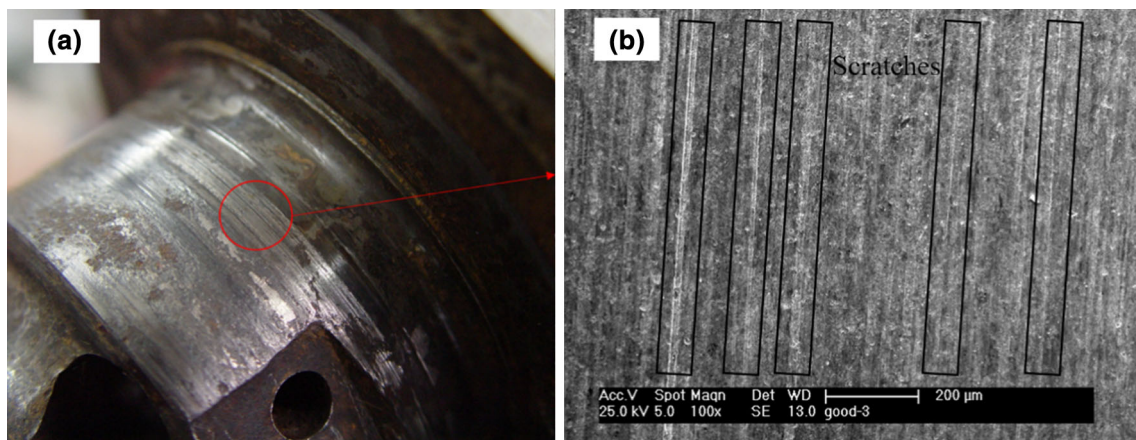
Abrasive wear of the bearing (a) macro-morphology (b) enlarged view
